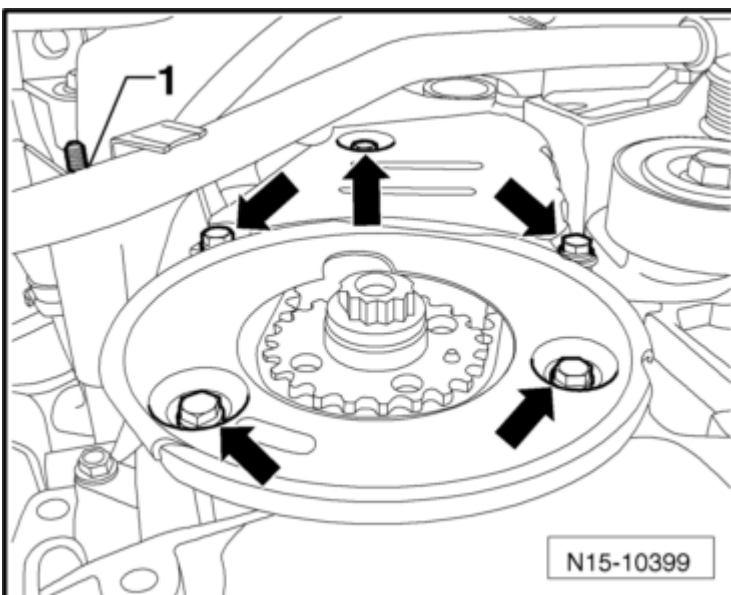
Identifying Lower And Center Toothed Belt Guard Bolts -Arrows-
